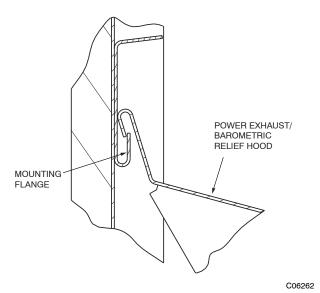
Barometric Relief/Power Exhaust Hood Flange
